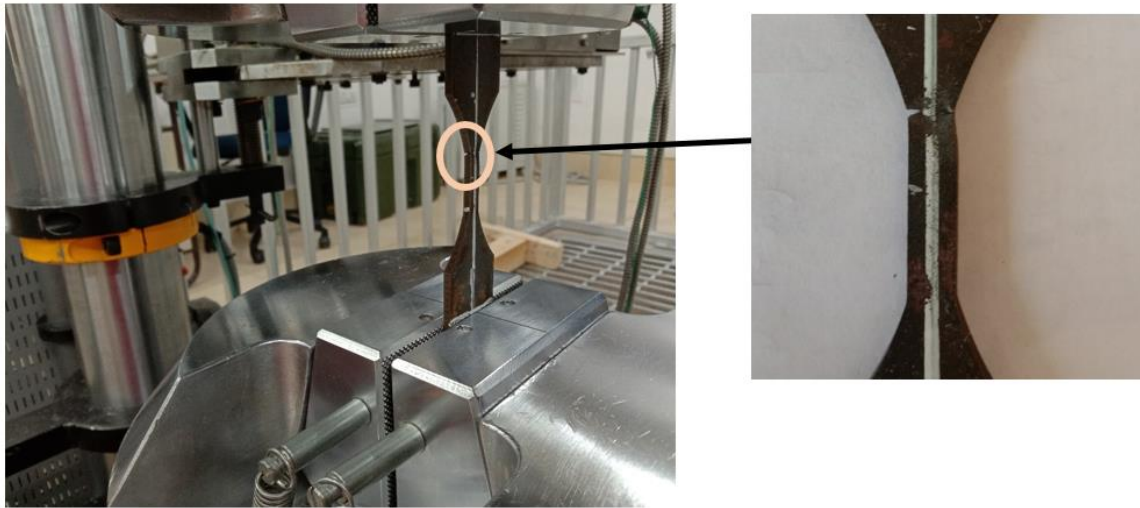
Tested specimen showing fatigue crack
